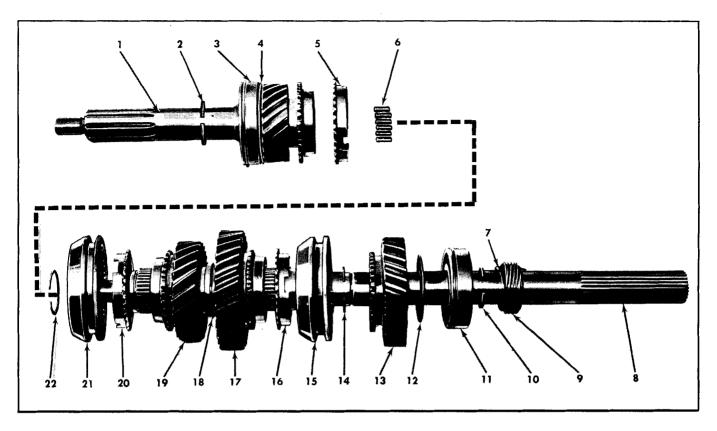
B-11 Main Drive Gear and Mainshaft Assembly
